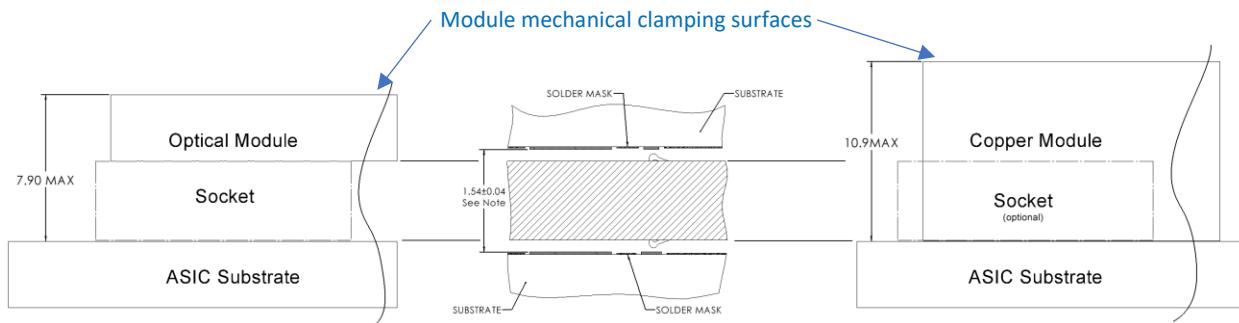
Socket Height and Tolerance (see notes below)
